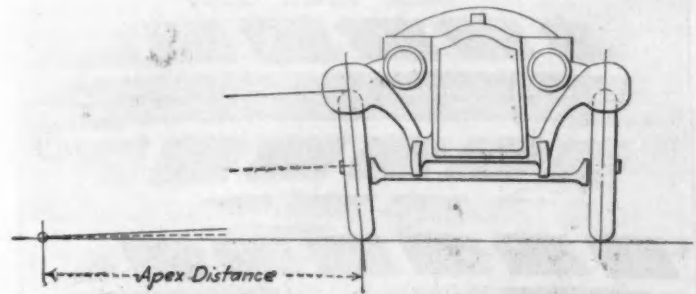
DRAWING SHOWING HOW A DISHED WHEEL CAN BE CONSIDERED AS THE BASE OF A CONE LYING ON ITS SIDE
